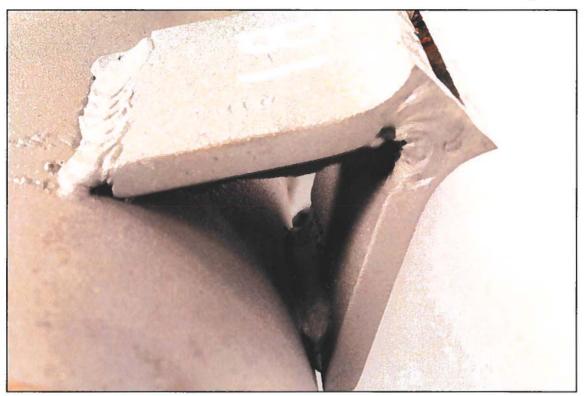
Image of the Lug B1 exterior top and interior bottom welds.
